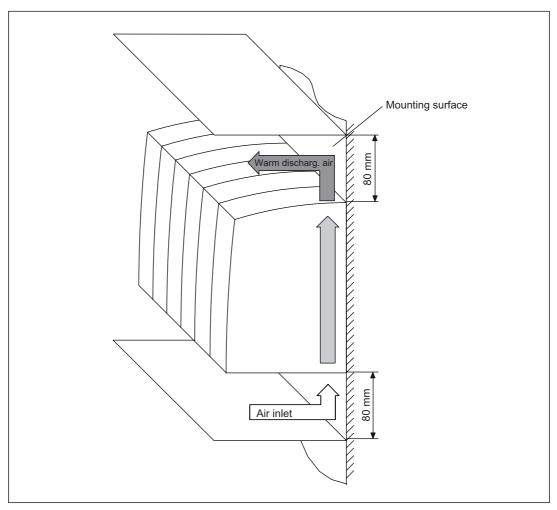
Clearances for booksize drive line-up with internal air cooling
